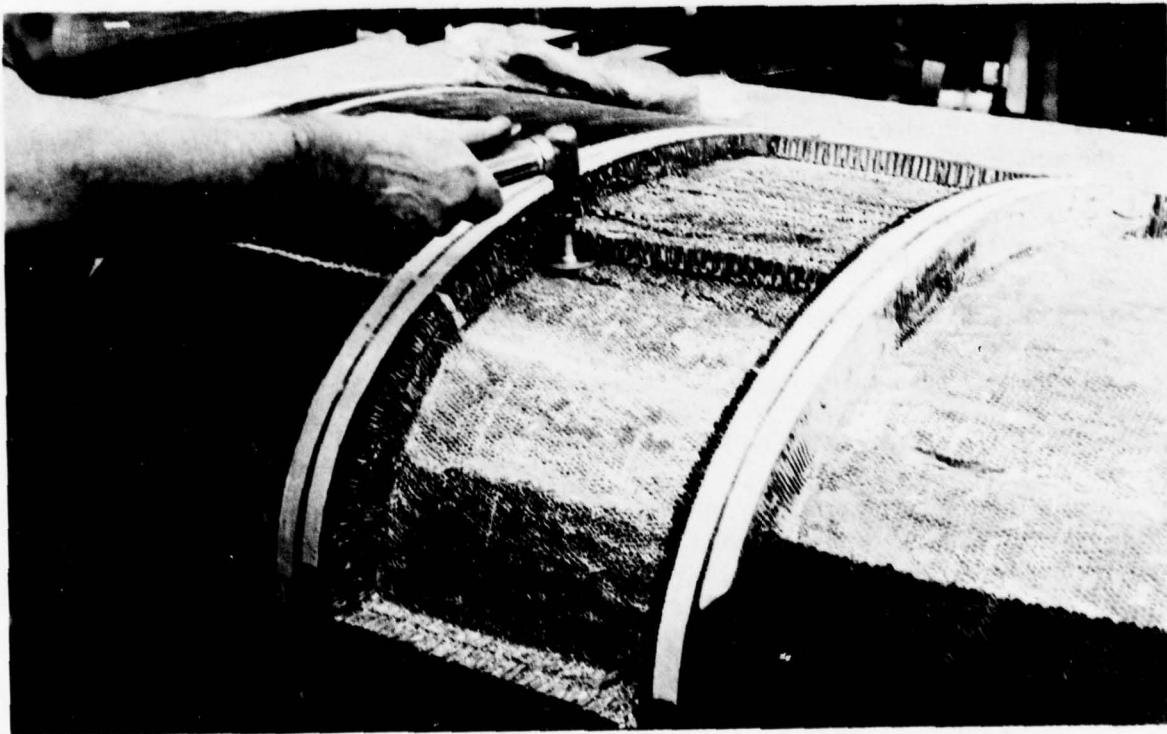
Damaged Core Being Removed With Abrasive Disk Mounted in High Speed Air Motor
